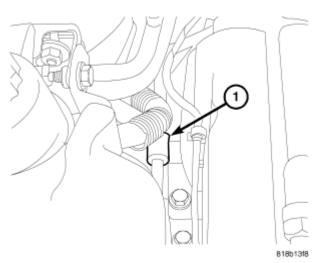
POWER STEERING LINE SUPPORT Courtesy of CHRYSLER LLC
